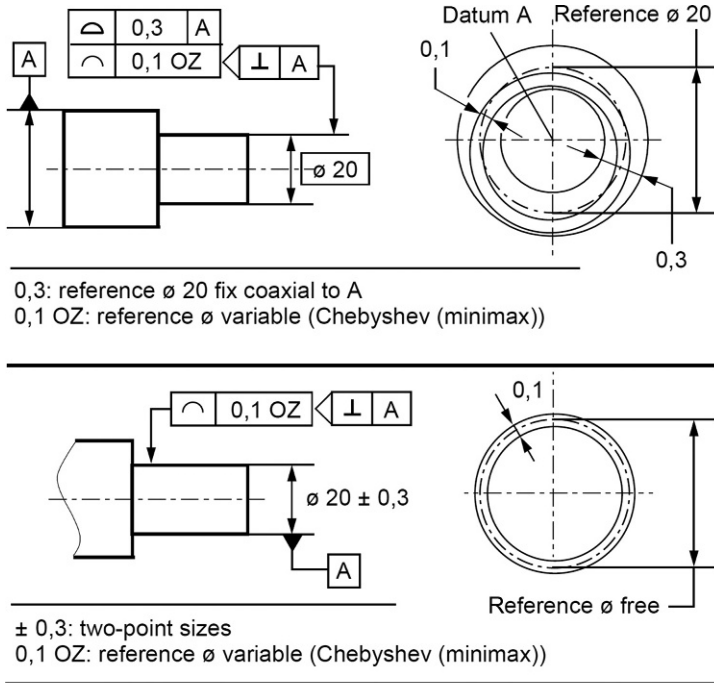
Form tolerances of integral lines (in section planes)
